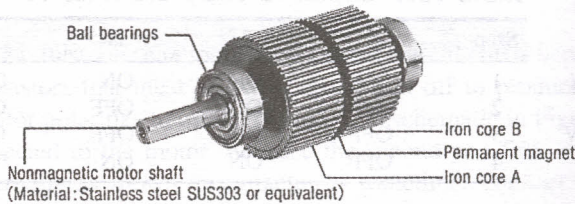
Actual stepper motor rotor. (Courtesy of Oriental Motor, Torrance, CA)
